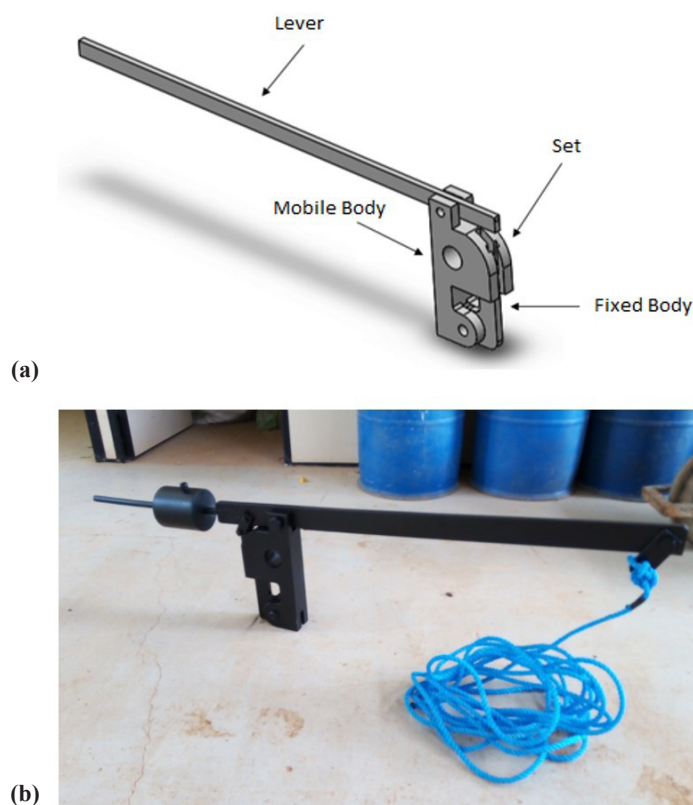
Experimental trigger: (a) 3D-Figure in Solidworks®; (b) built.
